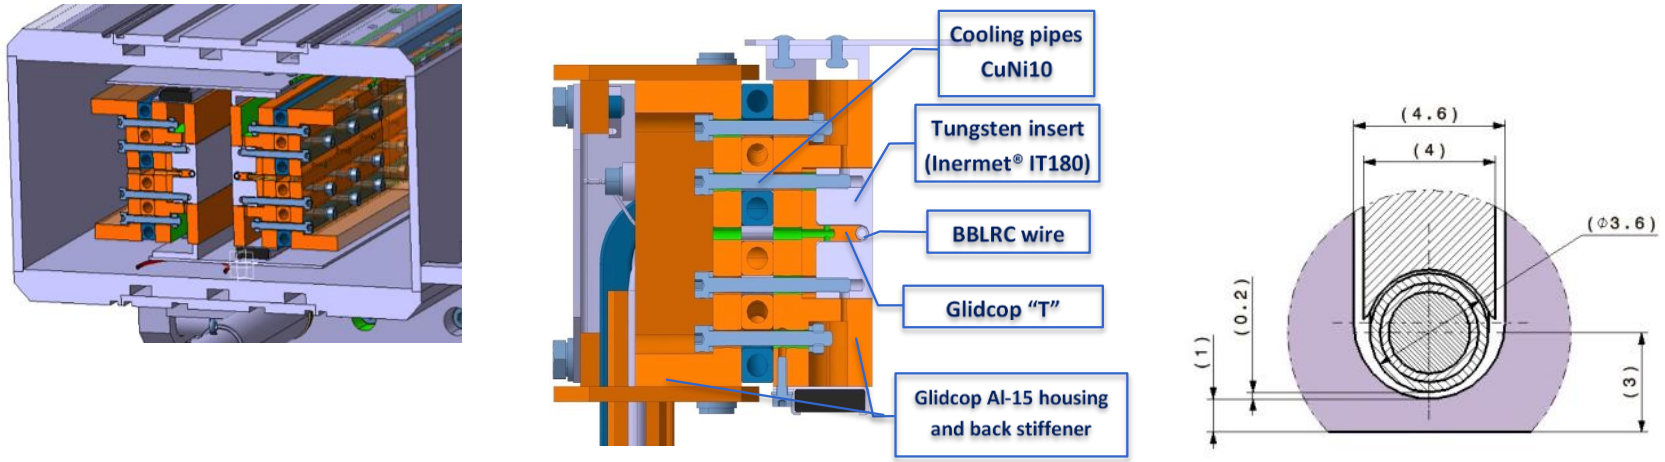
Details of the wire-in-jaw (left h.s.) and wire dimensions (in mm, right h.s.)
